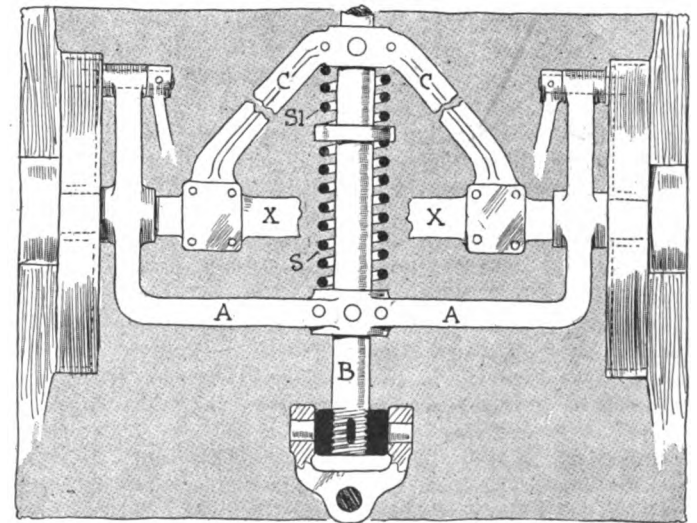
Diagram of device for tractor-trailer use, showing the principle of taking care of drawbar pull of the trailer. Parts are: Axle X; drawbar B; buffer spring S; reactive spring S1; backarm C
